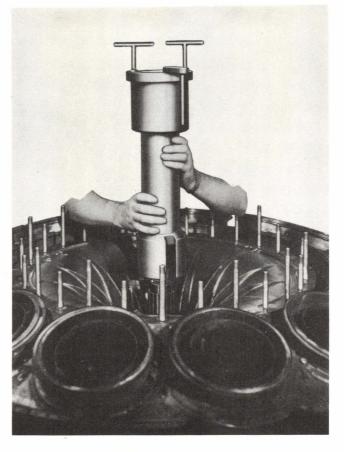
Removing the Bearing Retainer Ring with Tool No. 3615
